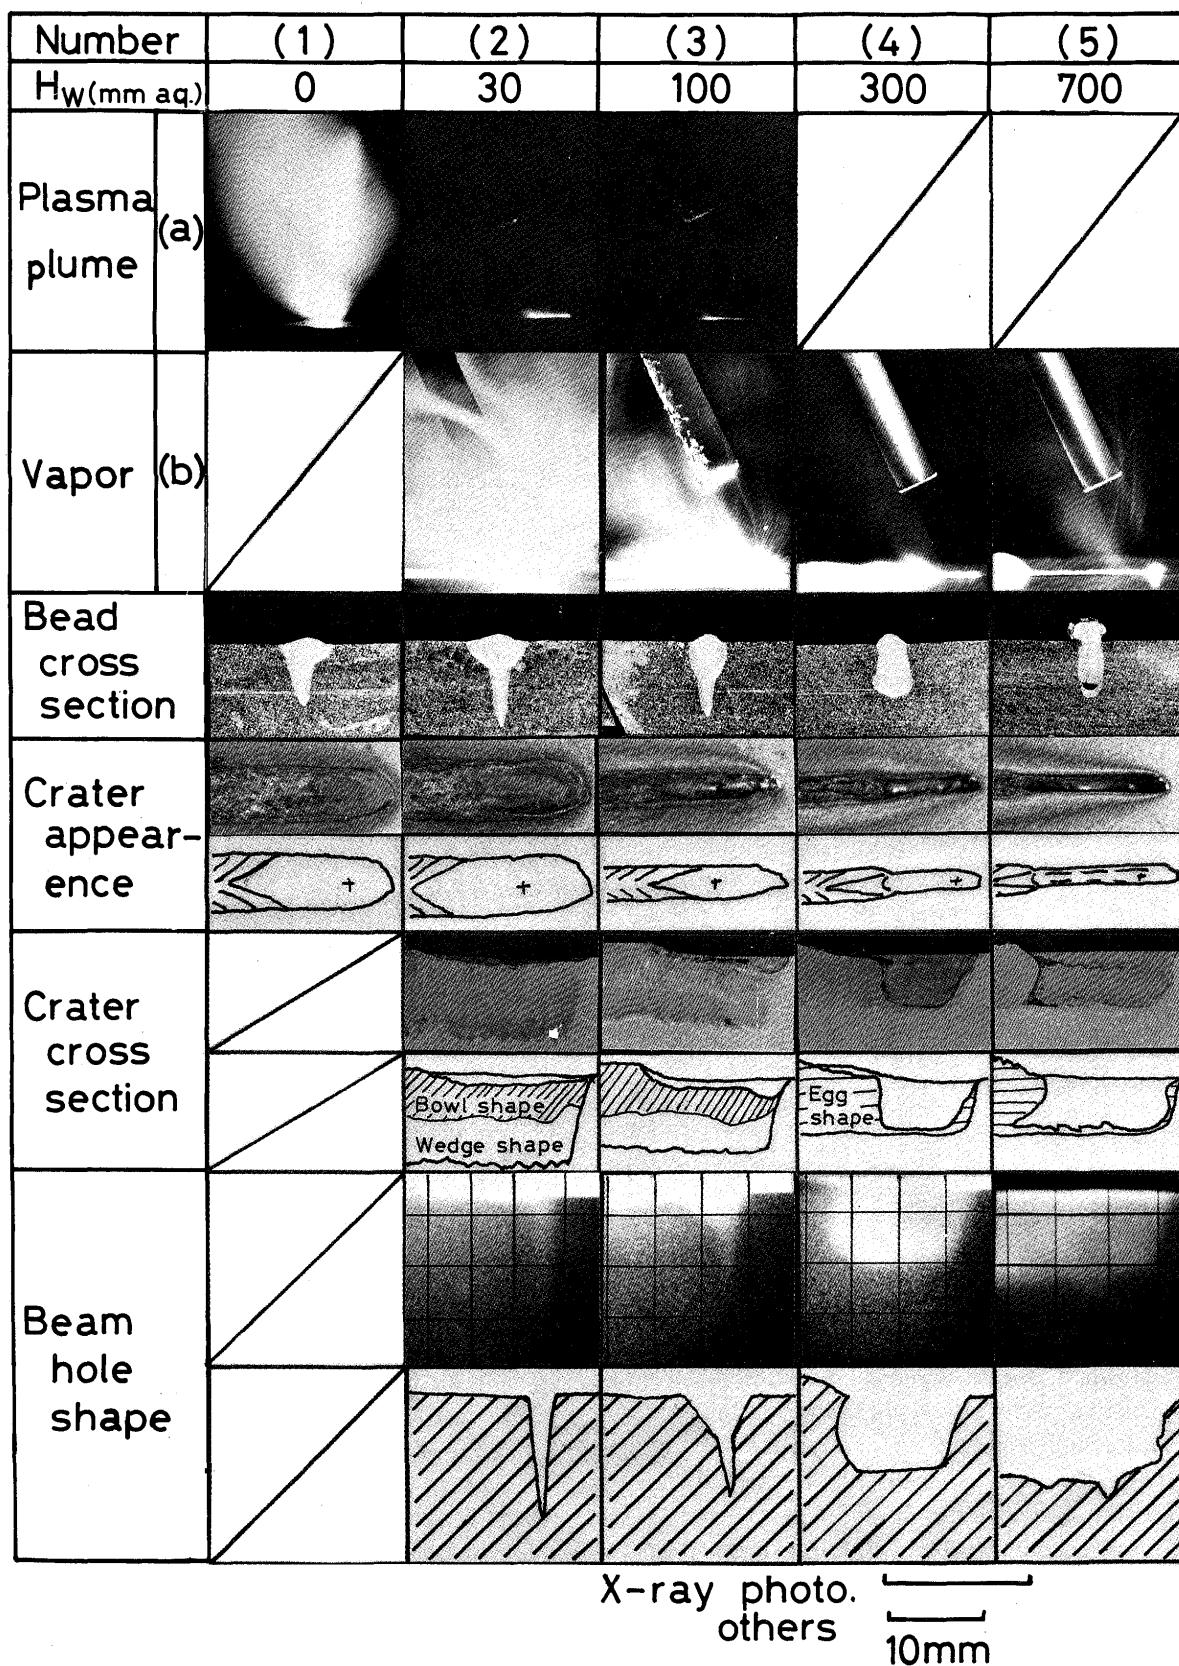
Typical photographys of plasma plume and vapor cloud above workpiece surface, bead cross section, crater appearance, crater cross section and beam hole shape by X-ray photography in Fig. 5.
